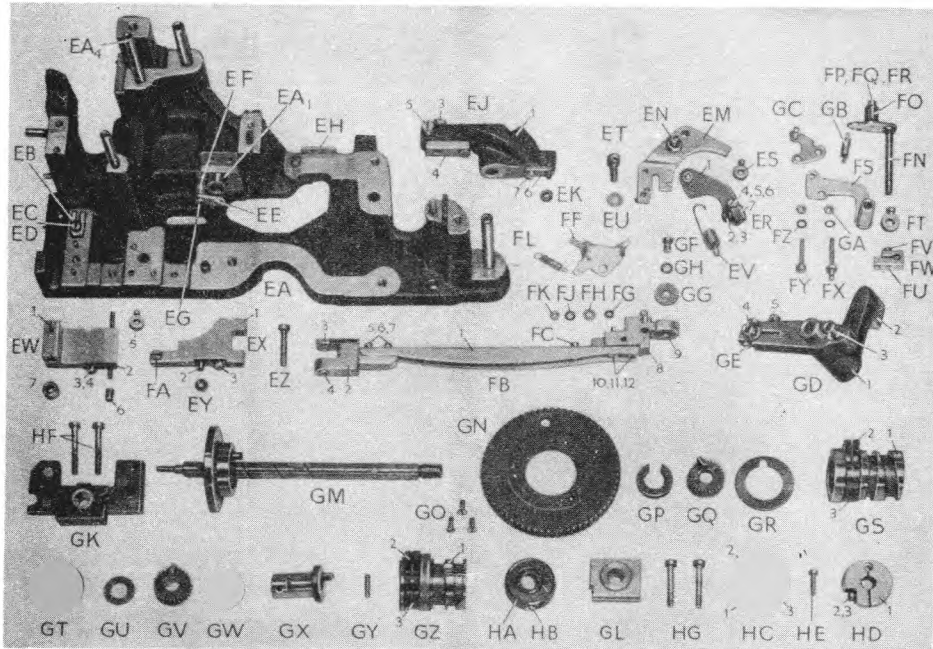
PARTIAL ASSEMBLY COMPONENTS.
